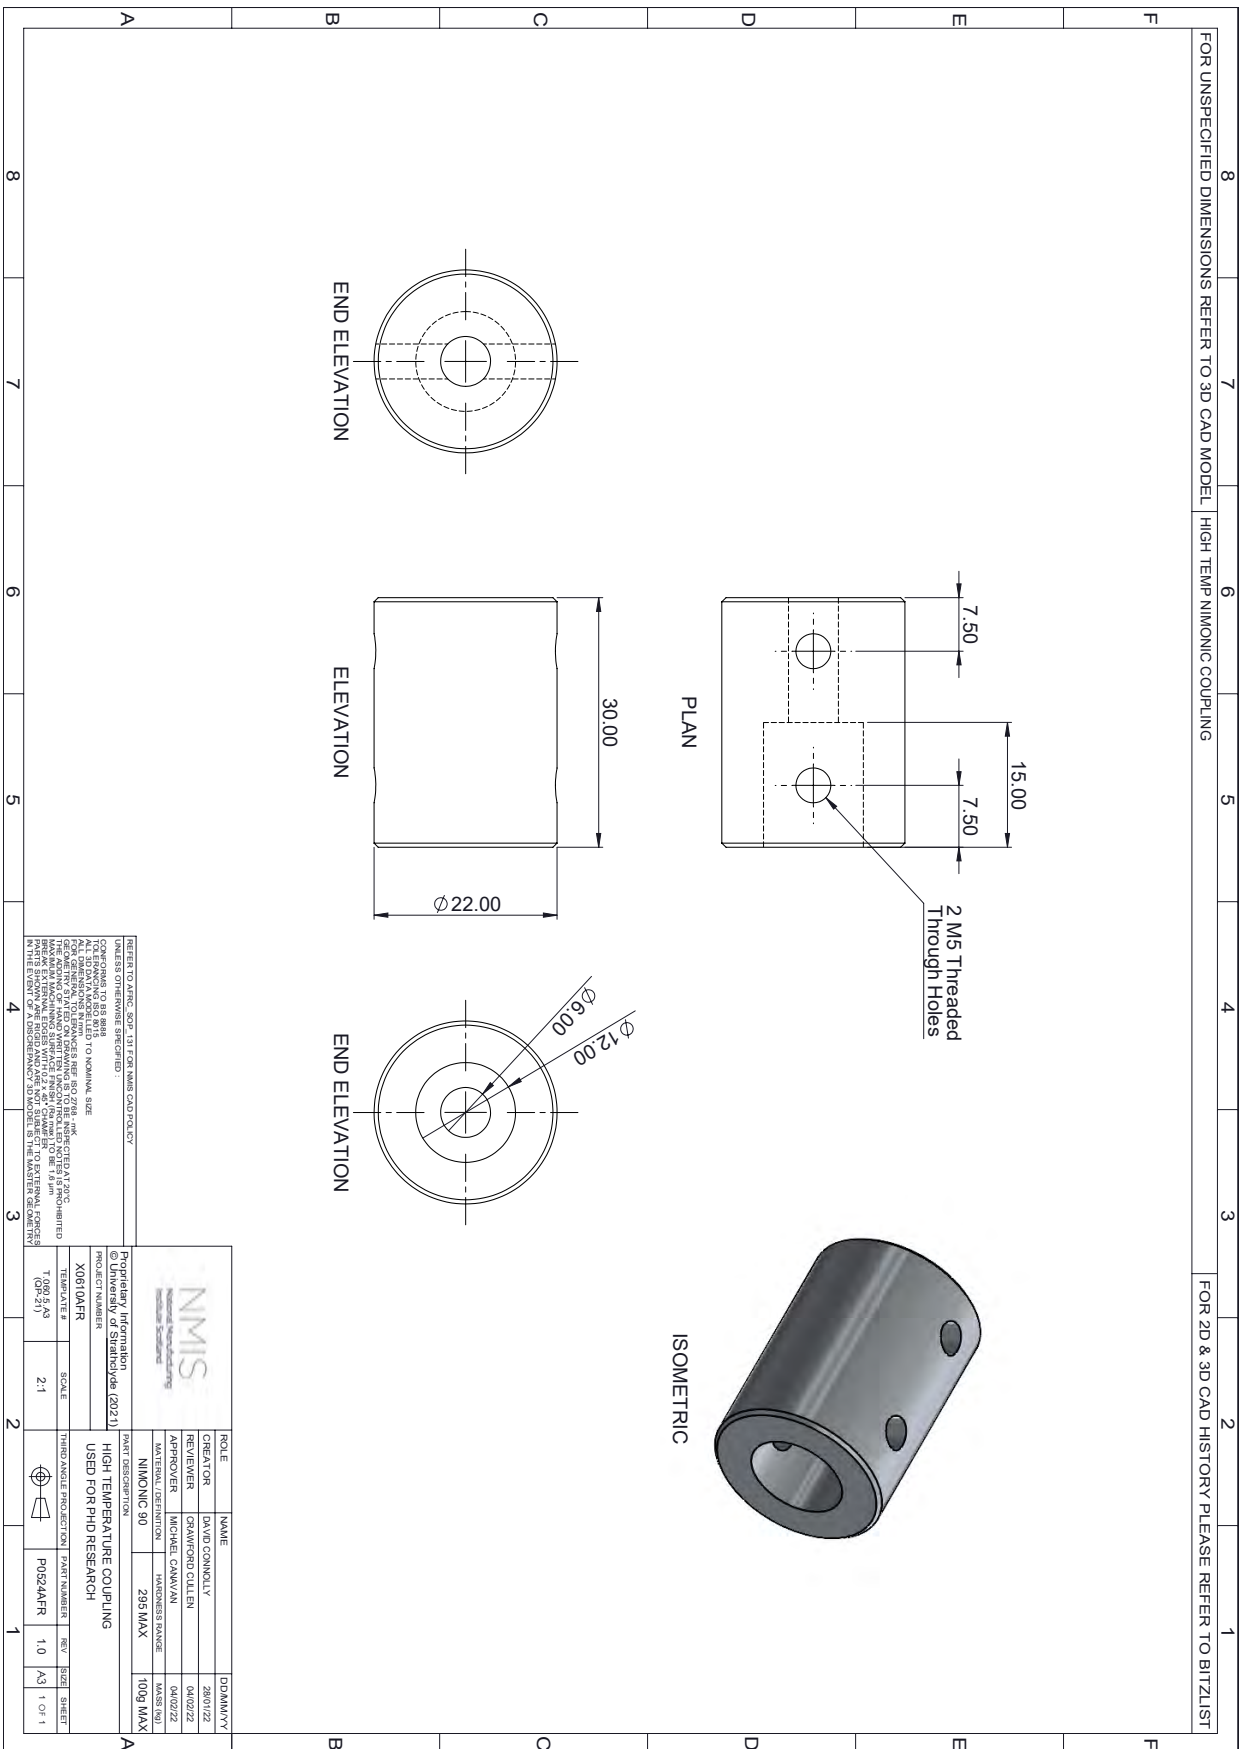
CAD Engineering drawing for type 316 stainless steel and Nimonic®-90 high temperature coupling.
